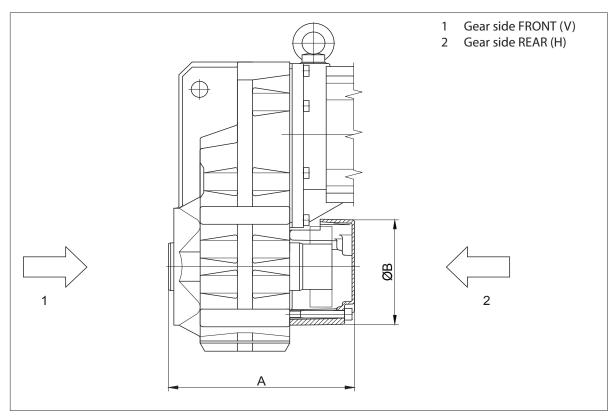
SSV cover for shaft-mounted gearbox BF10 ... BF90
